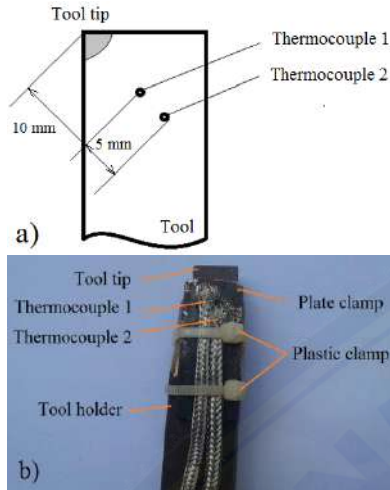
(a) Cutting tool thermocouple scheme; and (b) Thermocouple position at the cutting tool
